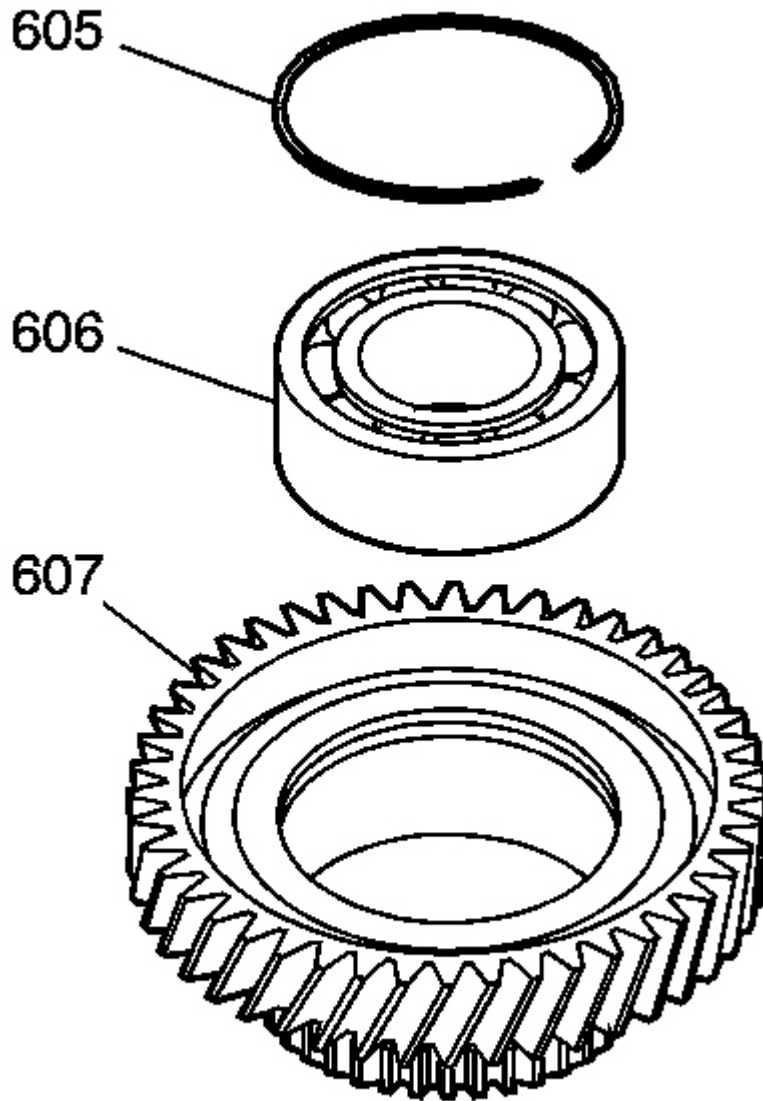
4th Drive Gear And Clutch Hub Bearing, Retaining Ring & Drive Gear
